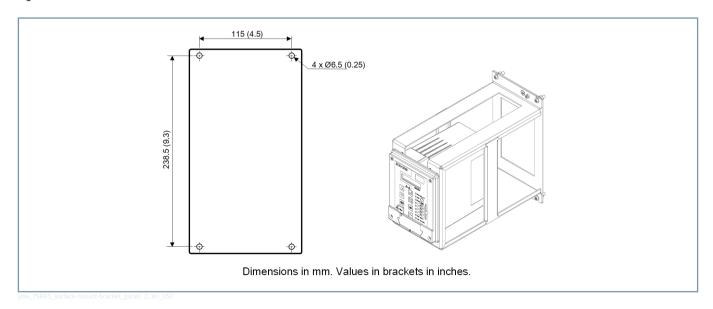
/2 Mounting Holes for Surface Mount Bracket and Assembled Bracket with 7SR45
